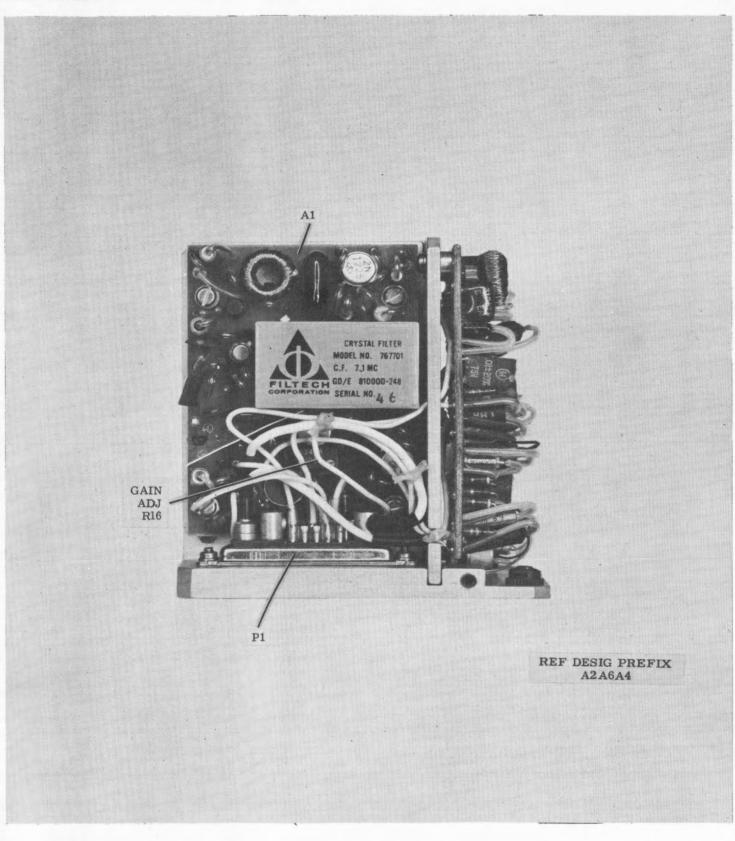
500 CPS Synthesizer Electronic Subassembly, Left Side, Component Location
